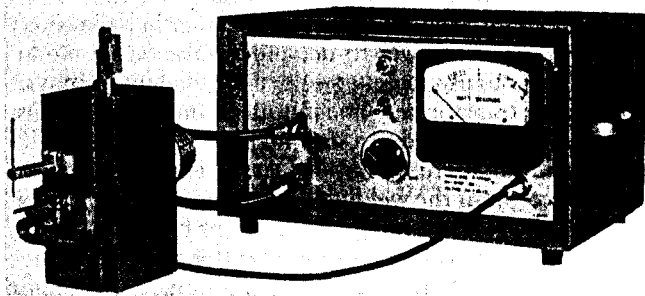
A Bench-Mounted Stored Energy Spot Welding Machine
